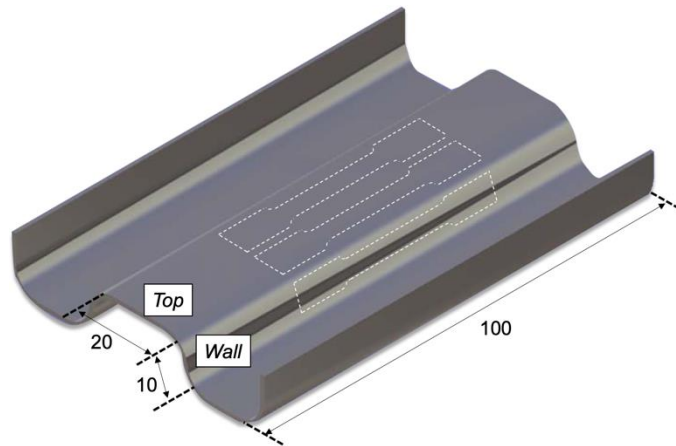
Schematic of DHPF part with locations of tensile coupons.
